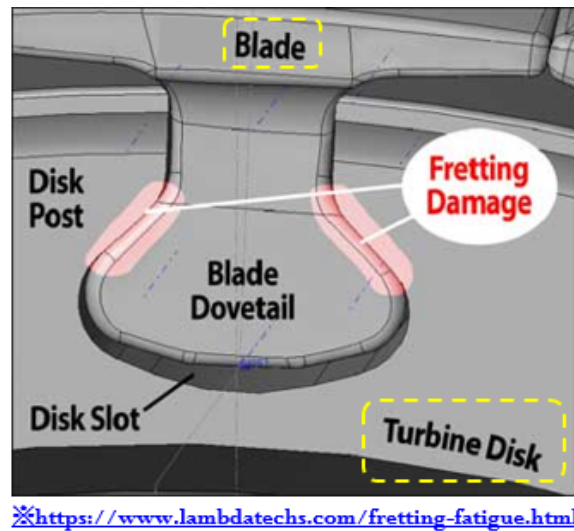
Schematic of fretting fatigue damage in blade/disk assembly
